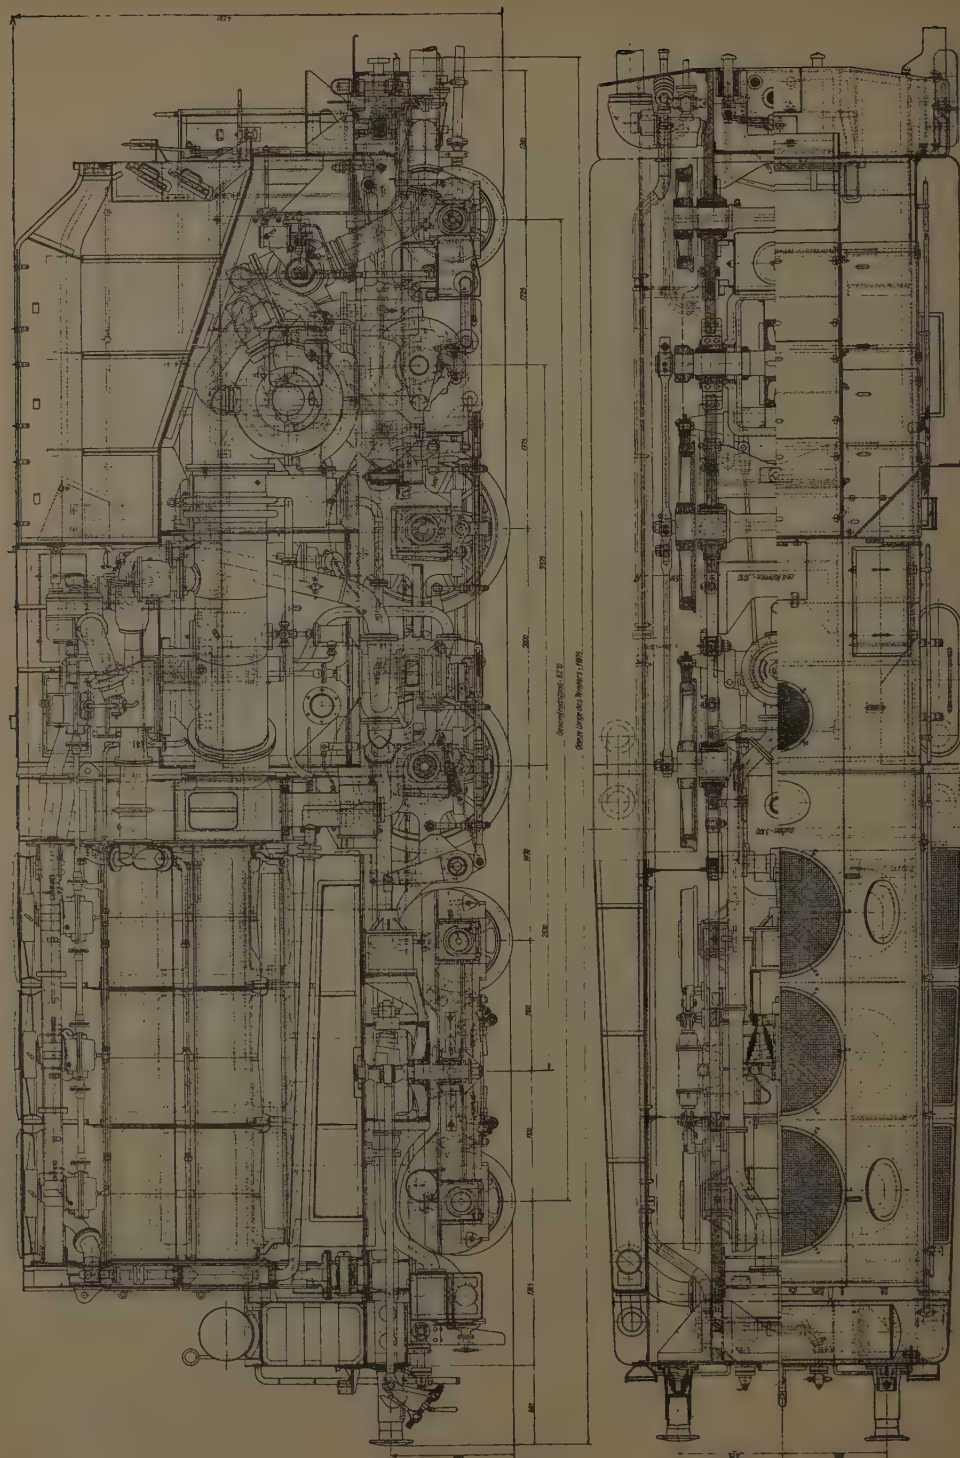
4-6-0 passenger locomotive with 2-4-4 motor tender driven by exhaust steam
